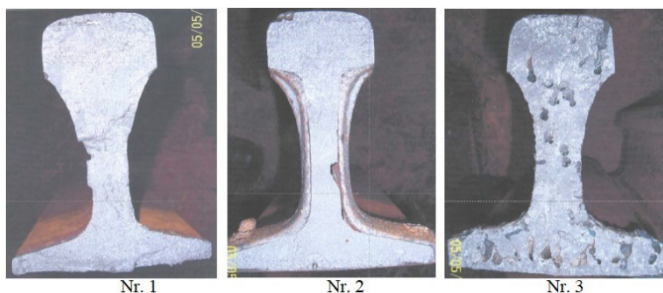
Samples of welded rail joints. No. 1 – no defects were found; No. 2 – the defect is fixed (inclusions); No. 3 – the defect is fixed (pores).
